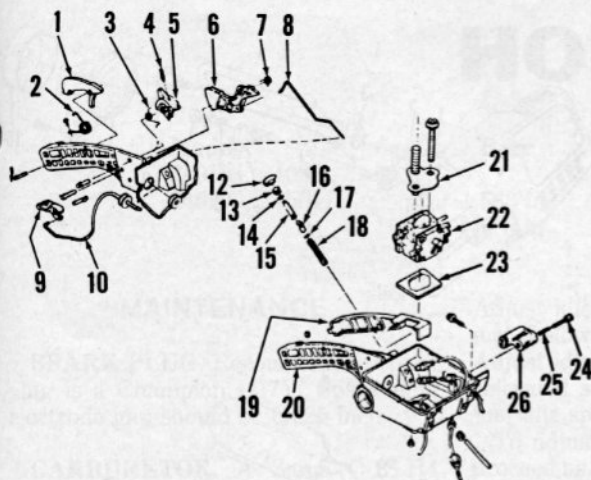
Exploded view of automatic oil pump used on Models 550, 550W and 550SL.
